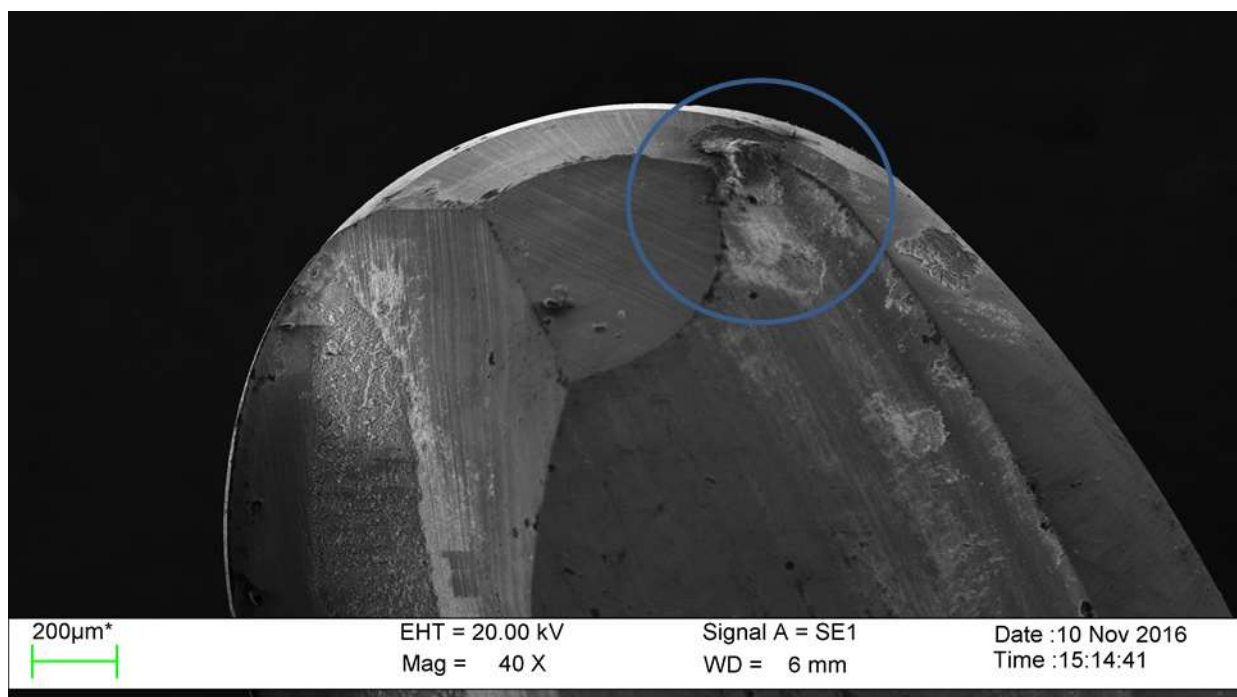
Example of Surface Welding on Relief Surface of Tool Highlighted in the Circle
